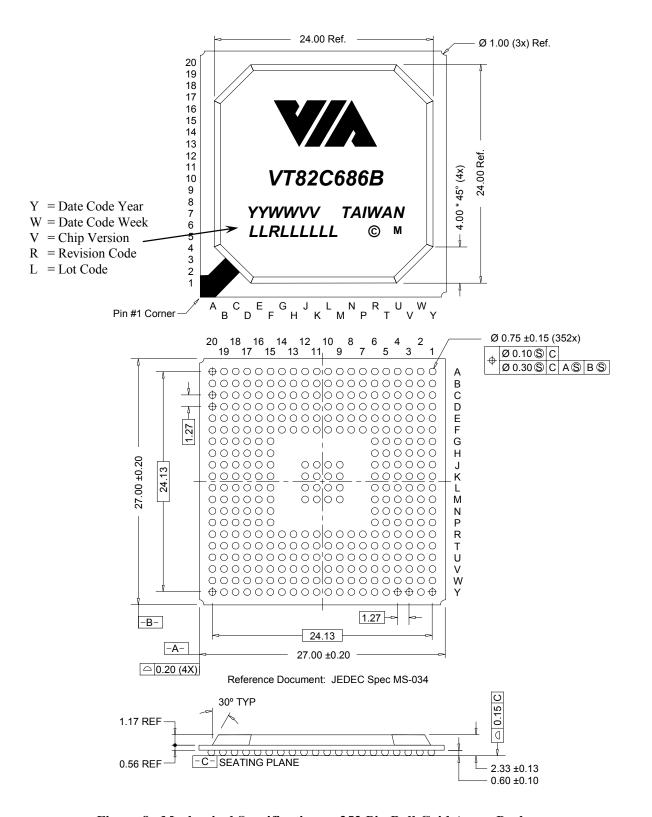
Mechanical Specifications – 352 Pin Ball Grid Array Package
